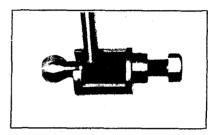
Removing Pivot in Steering Arm with Puller 90743
